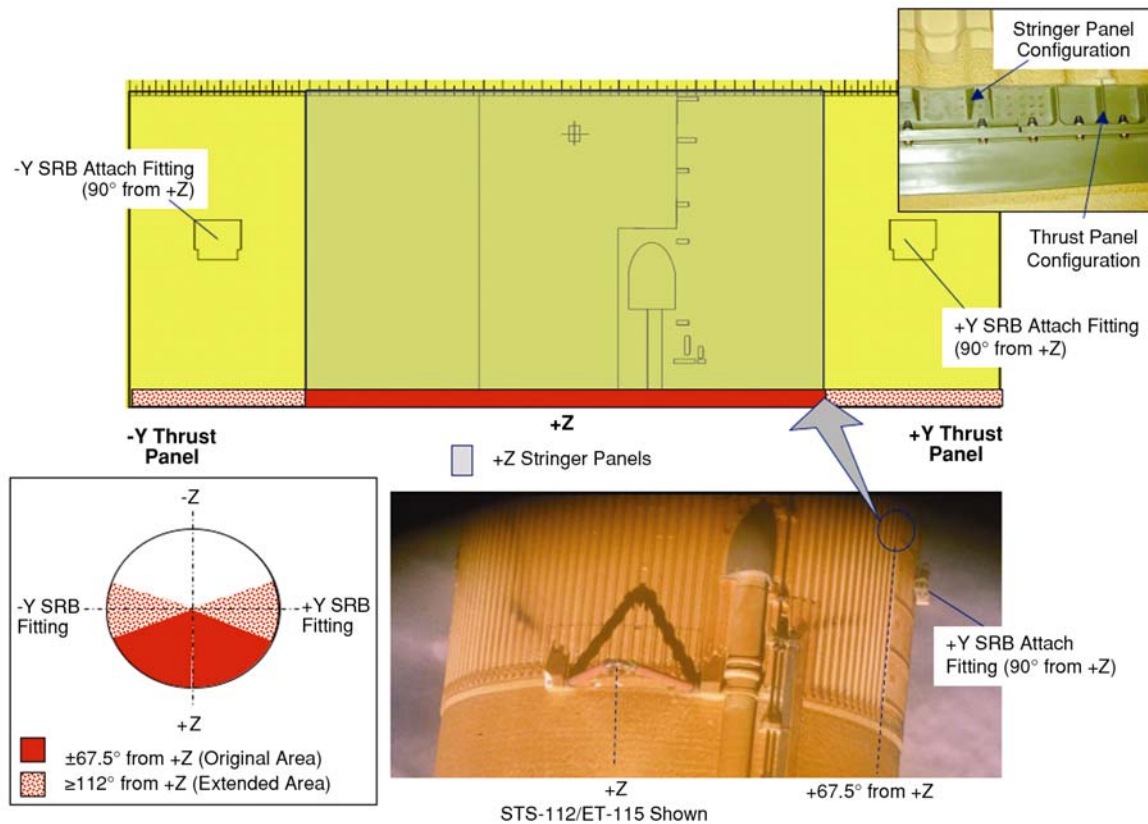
LH₂ intertank flange expanded debris zone.
